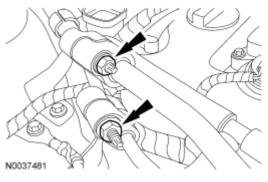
Locating A/C Tubes Nuts Courtesy of FORD MOTOR CO.
